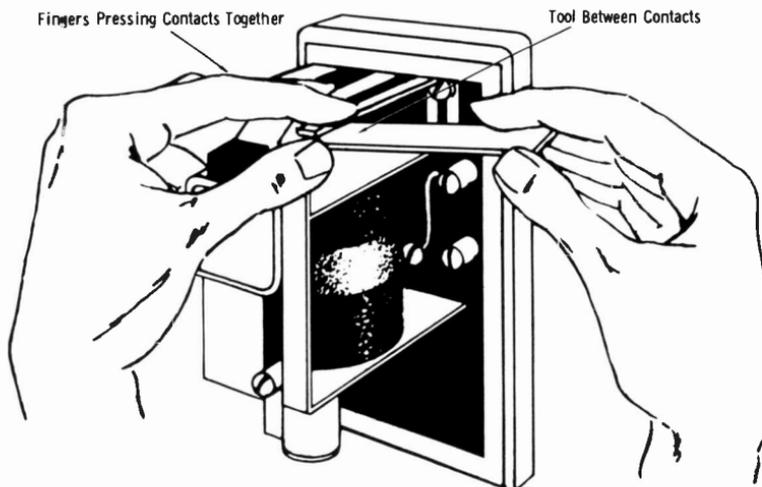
Method of cleaning hard-alloy relay contacts.
